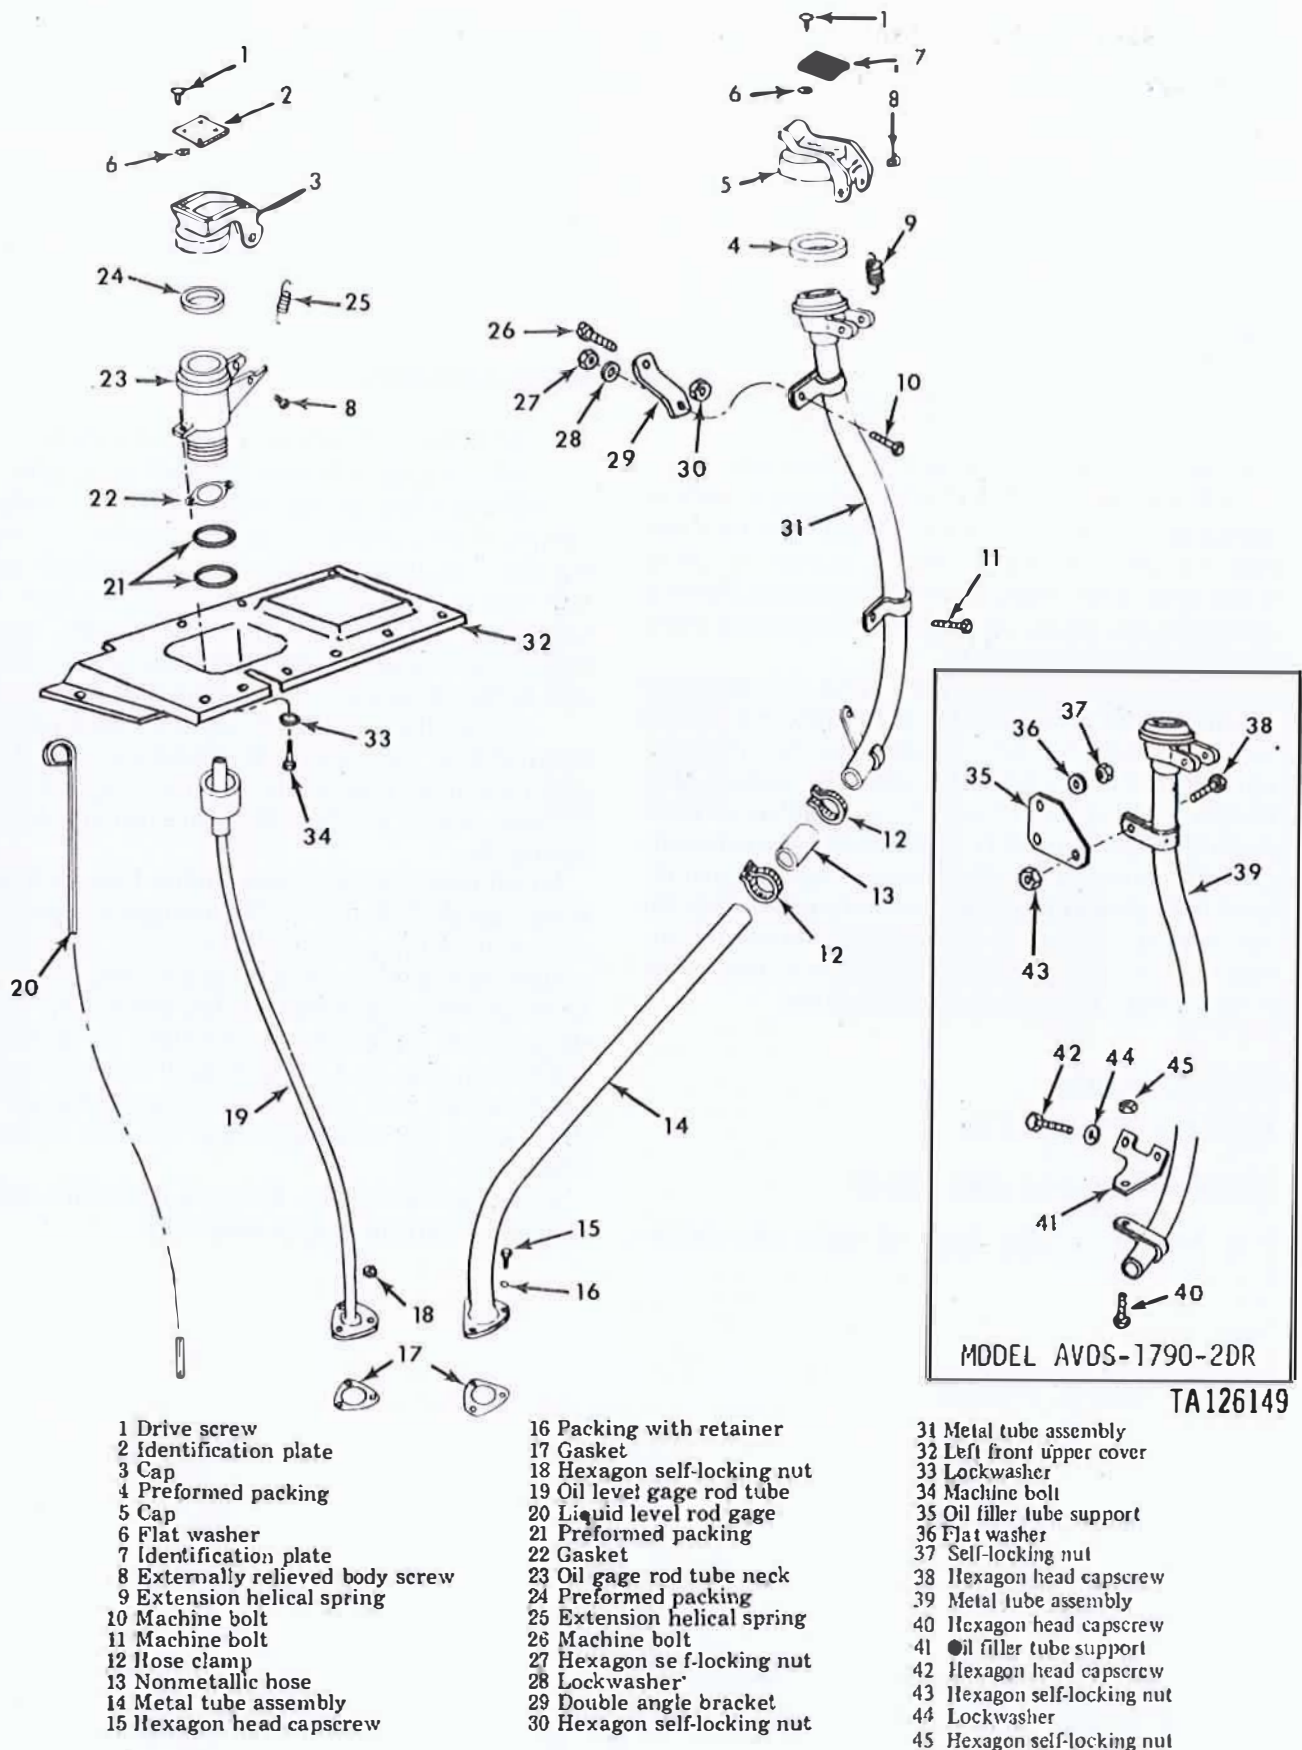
Oil filler and oil level indicator tubes and associated parts - exploded view.
